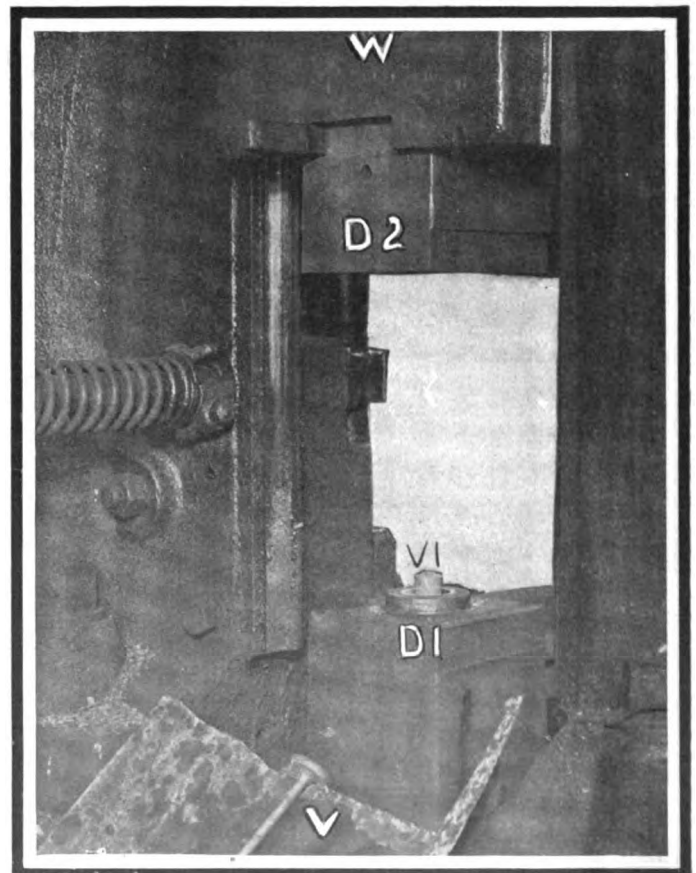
Showing the hammer with the valve in position ready to be stamped
